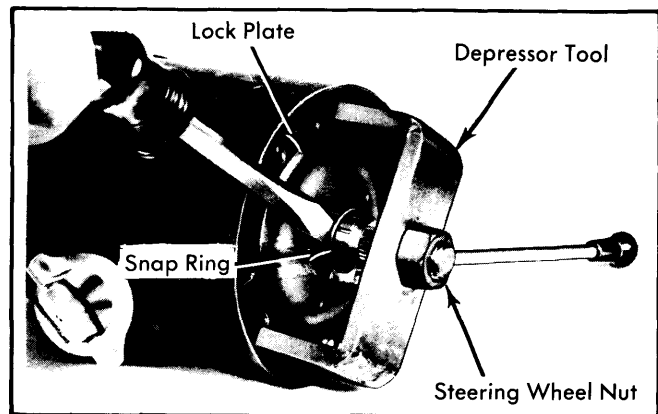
Removing Snap Ring Using Lock Plate Depressor Tool
